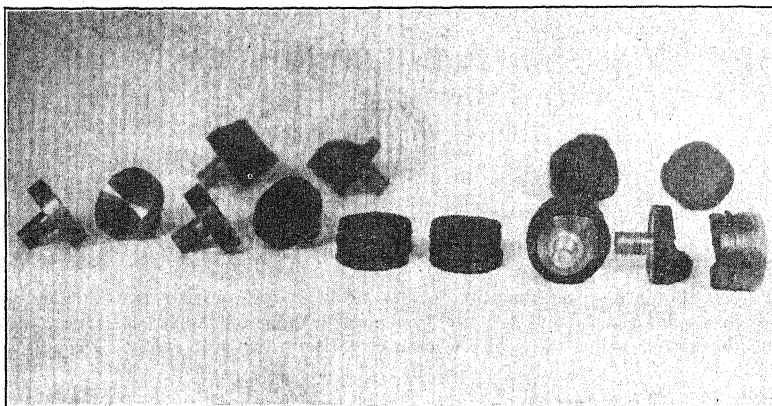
Views of Test Specimen Showing Individual Metal Parts and Rubber Cylinders.
